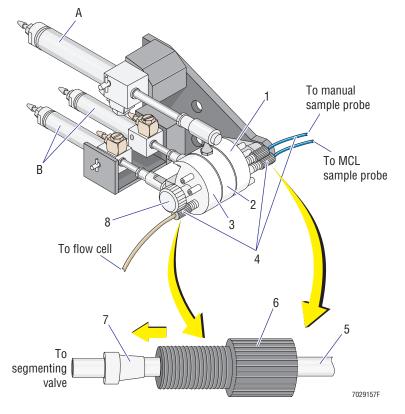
Segmenting Valve Assembly (See Table 8.2-34)
